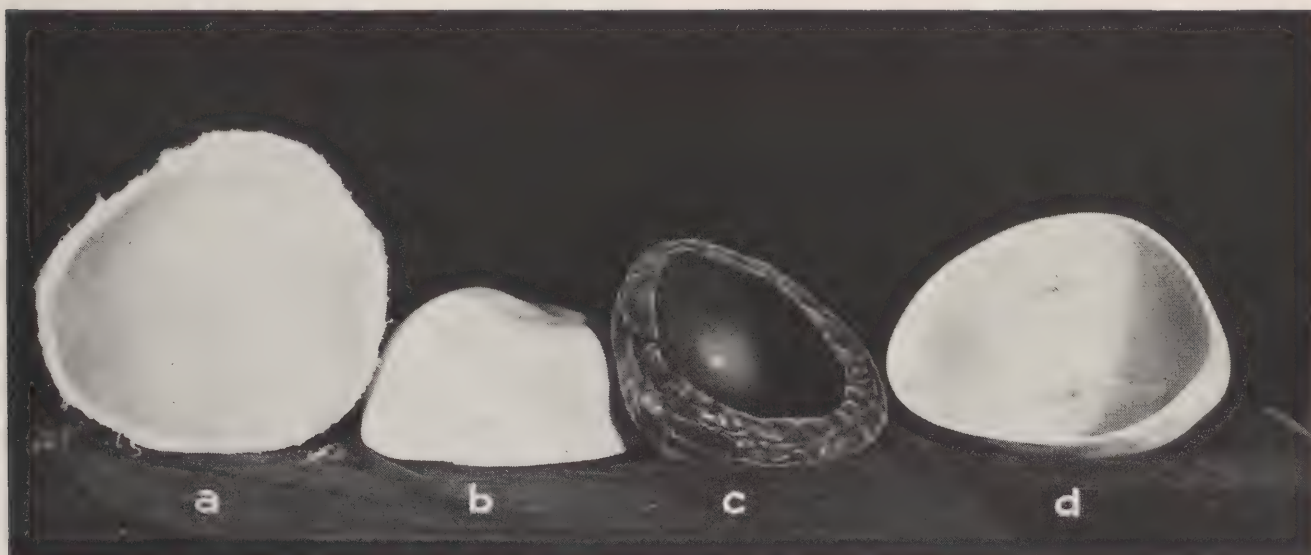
Steps followed in bag-molding a disarticulation socket.
